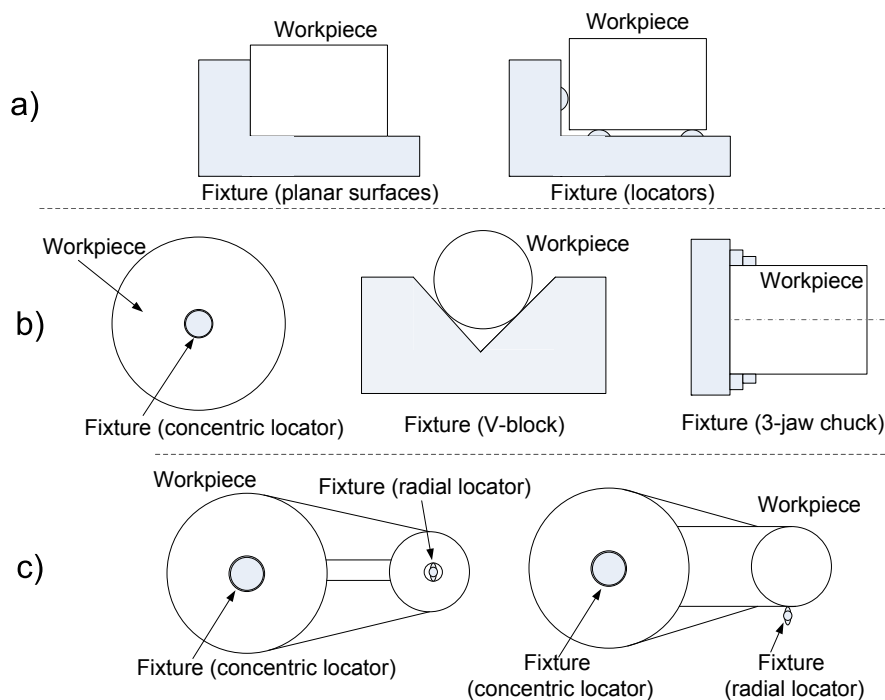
Examples of generic forms of location. a) plane location with fixture surfaces and locators; b) concentric location with concentric locators, V-blocks and 3-jaw chucks; c) radial location with concentric and radial locators.
